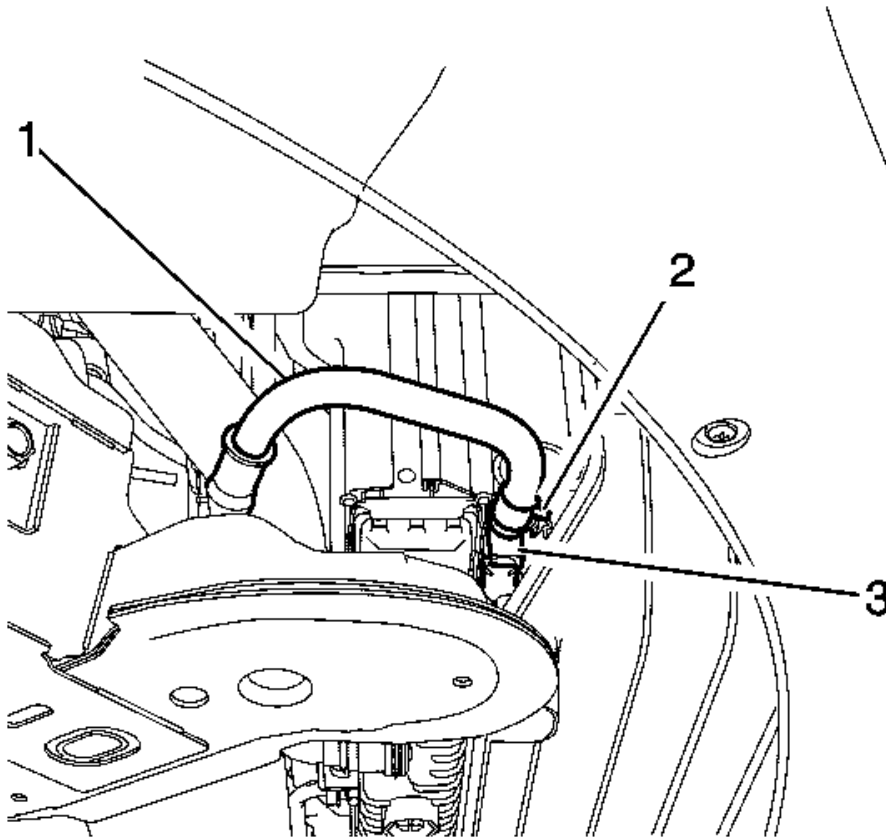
View Of Power Steering Cooler & Power Steering Gear Outlet Pipe/Hose With Spring Clamp
